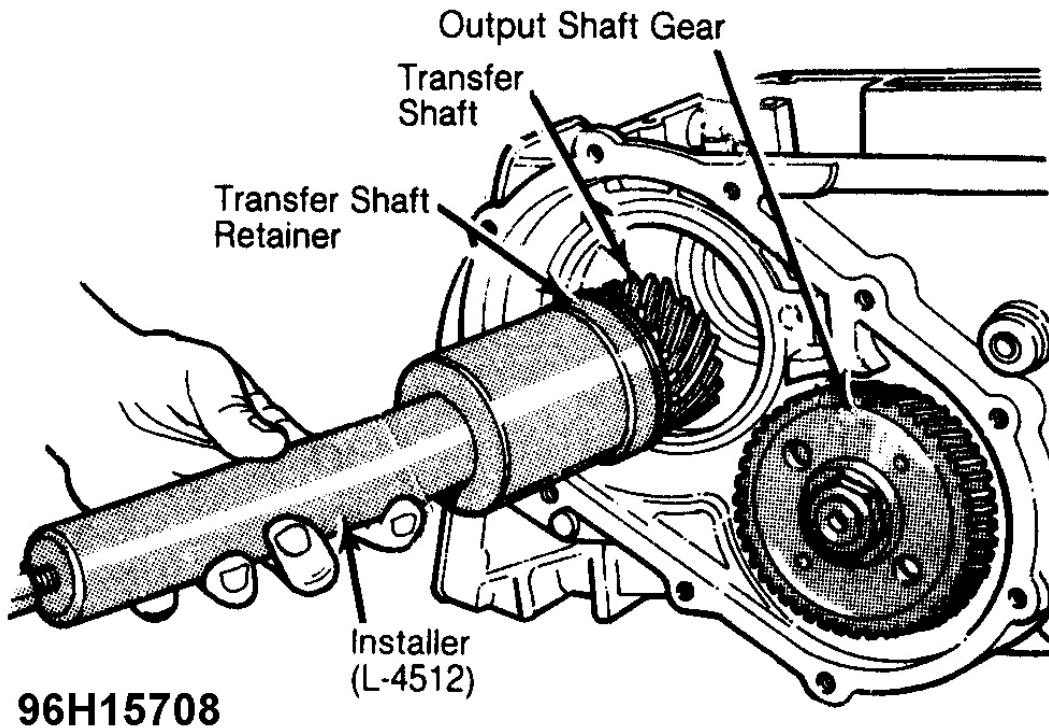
Installing Transfer Shaft Into Case Using Installer (L-4512)
